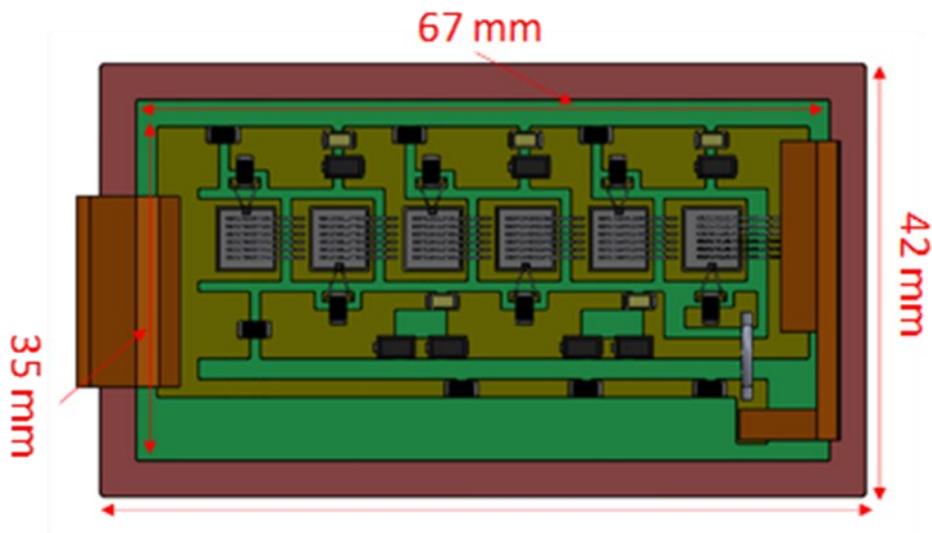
(a): ERCD board with populated devices in a PEEK carrier board
